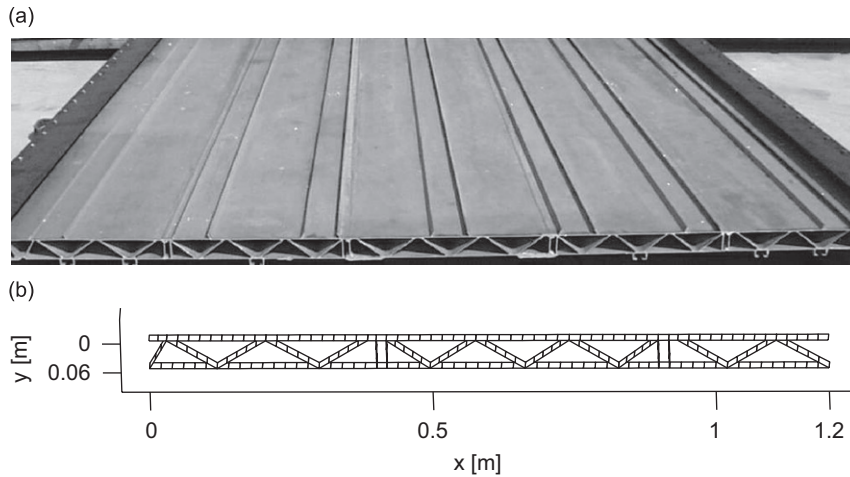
Light weight train floor section (extruded aluminium). (a) Photo (b) WFE model of half cross section, 20 mm element length in the z -direction.
